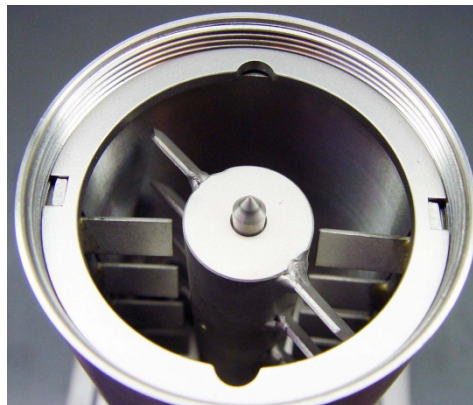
Bottom Retainer Holding Side Blades in Place
